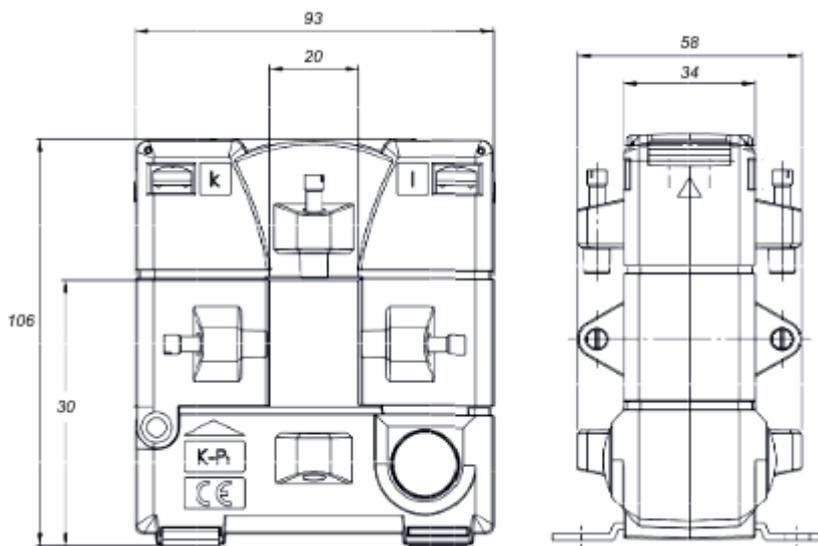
SCT4616-0018 dimensions, all dimensions in mm
